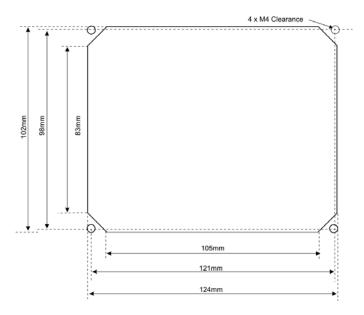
Stainless Steel Panel Mount & Programming Display Module, Dimensions & Mounting Points
